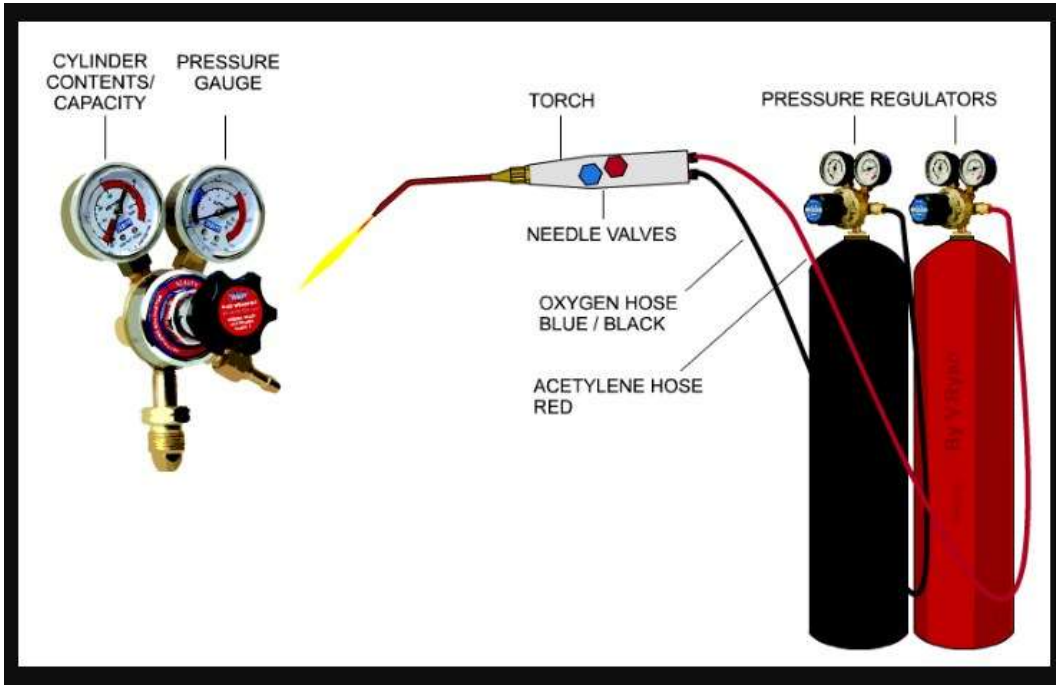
Oxy-acetylene welding equipment.
